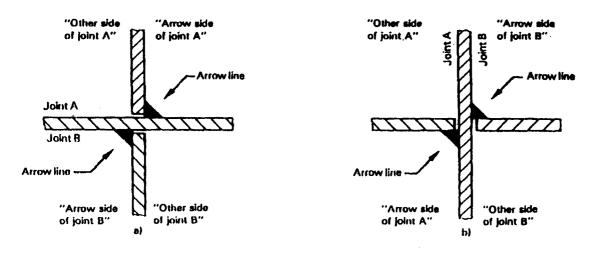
CRUCIFORM JOINT WITH TWO FILLET WELDS
